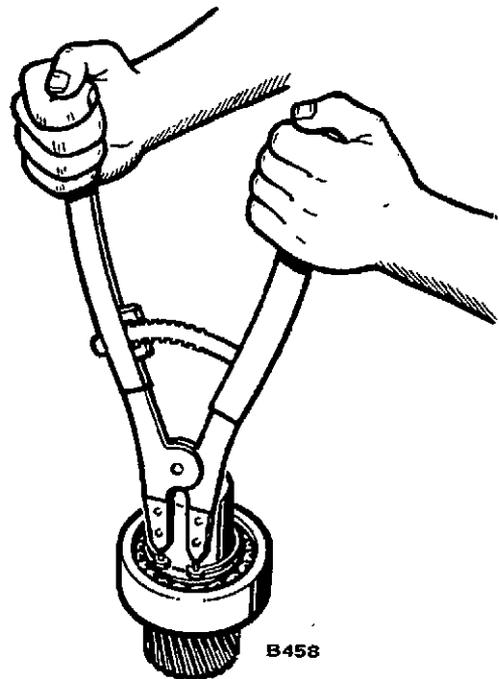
EXCITER ROTOR LOCKING NUT REMOVAL
